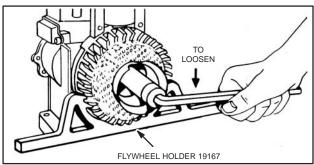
REMOVING FLYWHEEL NUT (1/2" DIA. THREADS)
